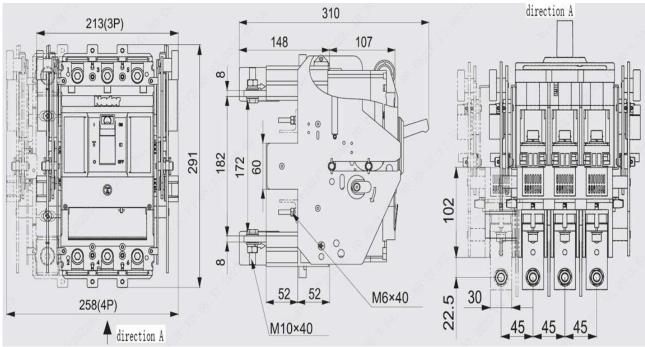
3P/4P Outline dimensions of withdrawable board rear wiring products Note: Unmarked tolerance level should follow GB/T 1804-c.
